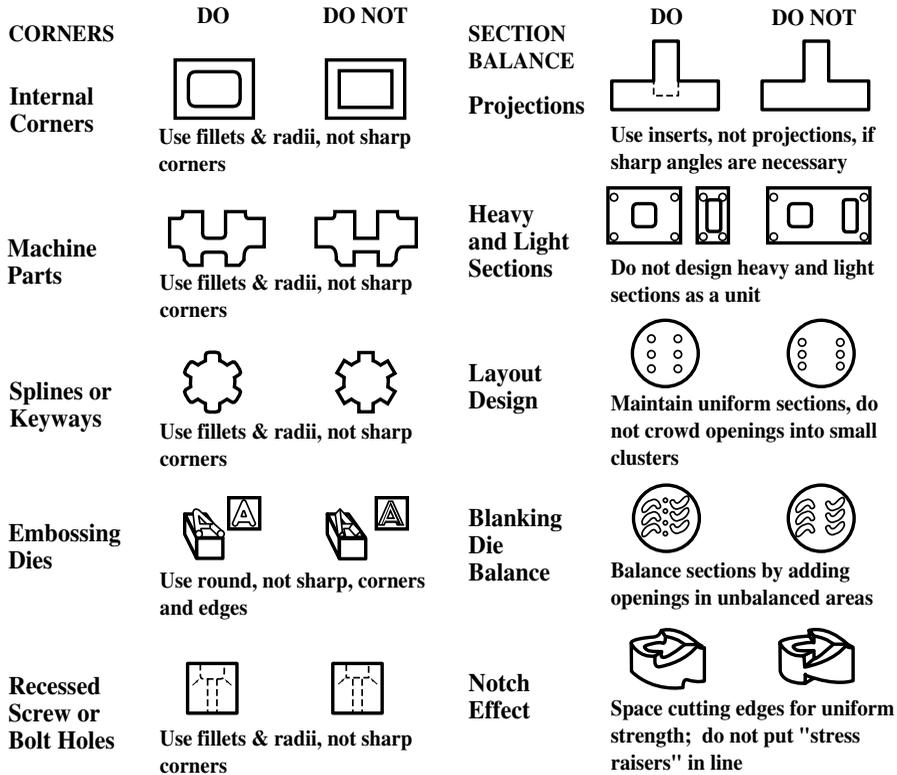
Tool and die design tips to reduce breakage in heat treatment.
